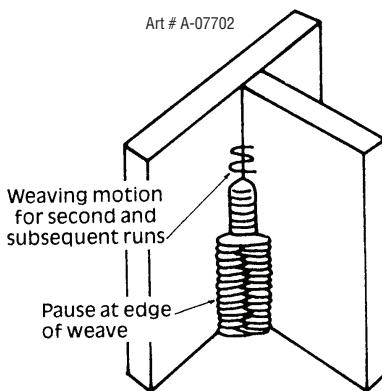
Multi Run Vertical Fillet Weld
